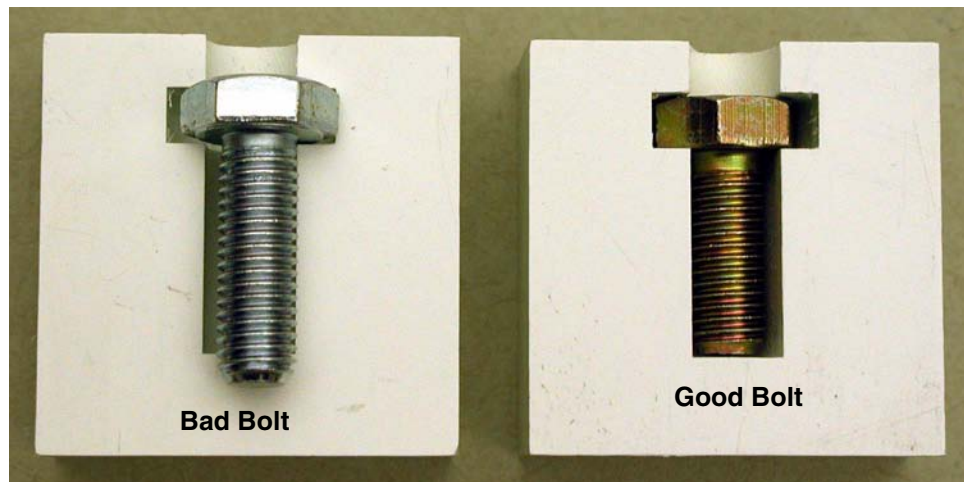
Measuring Block Usage: 30mm bolt shown at left, 25mm bolt shown at right
